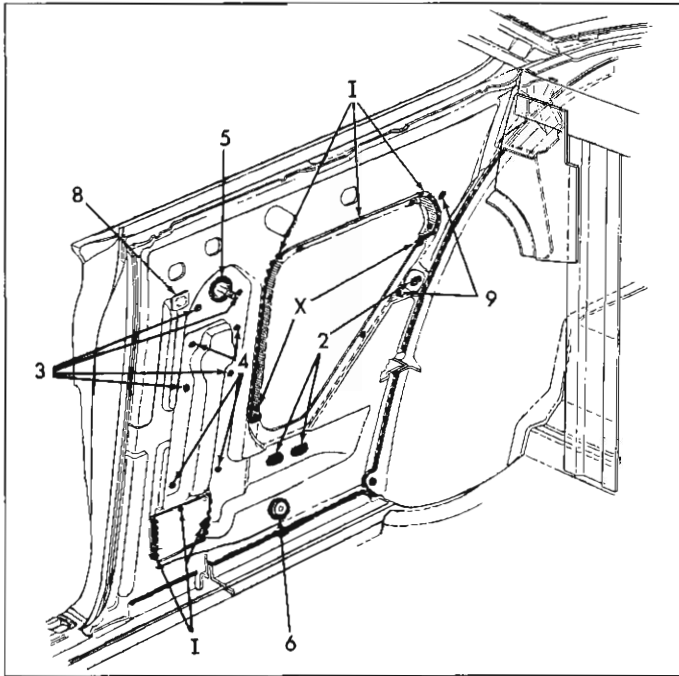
Quarter Inner Panel Sealing "37" and "47" Styles
